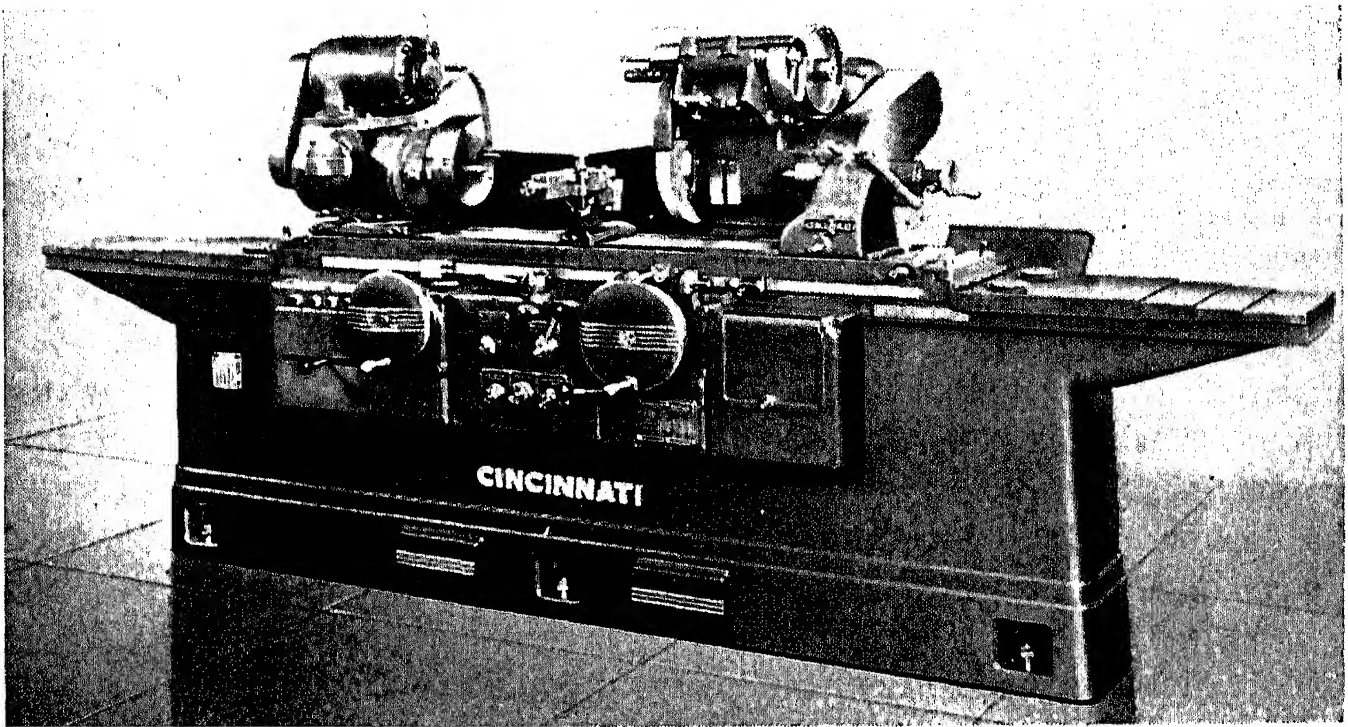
A 12 in. by 36 in. universal centertype hydraulic grinding machine.
